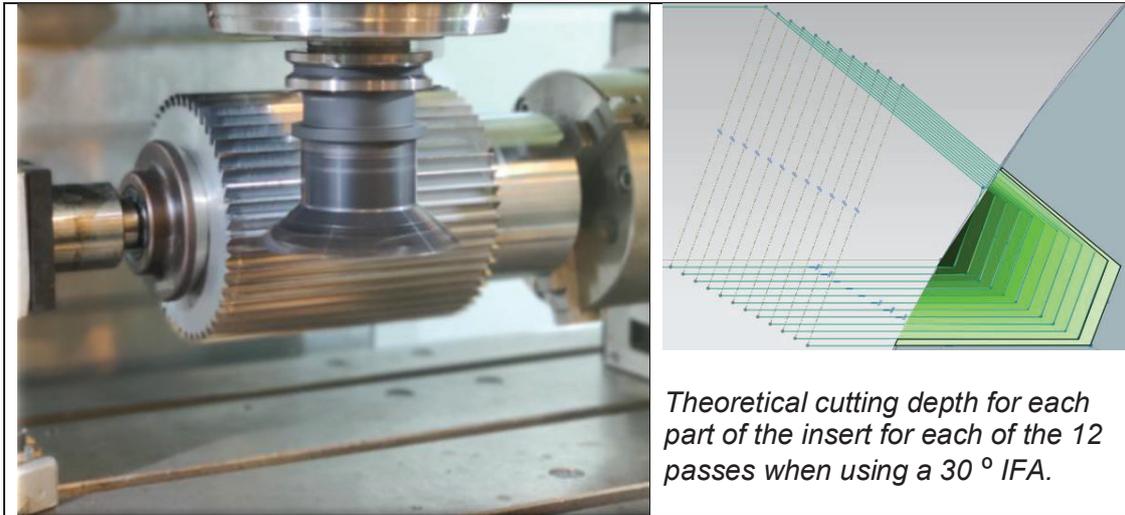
Tool holder and blank, mounted in a pneumatic doll bolted to the milling table.
